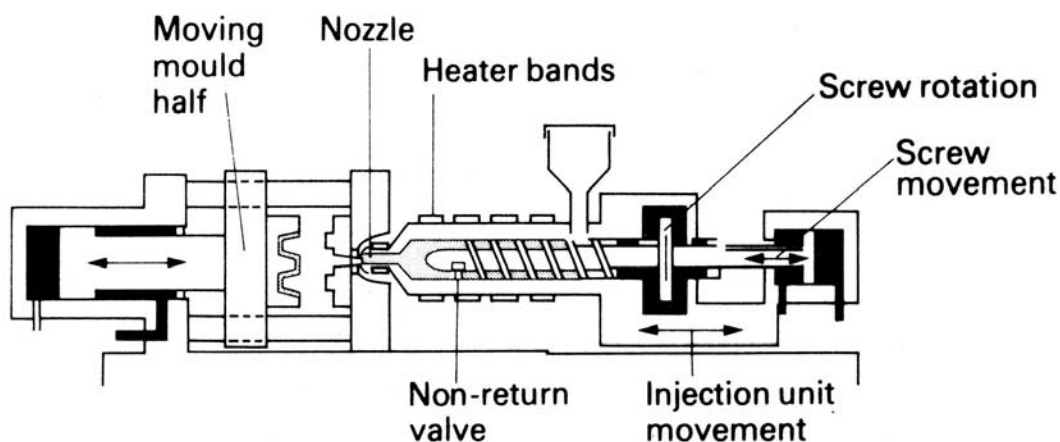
Schematic view of a hydraulic injection moulding machine with its main components [Mills, 2005].
